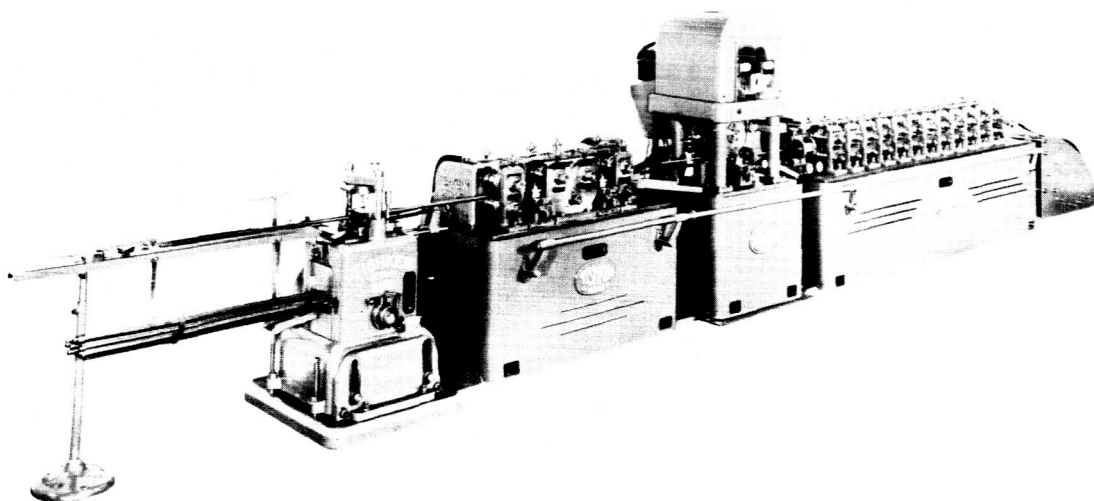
A PRODUCTION LINE TO PRODUCE WELDED TUBING
